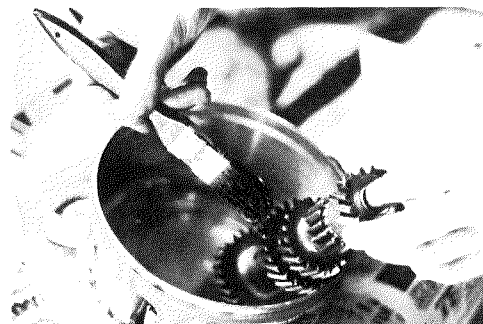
Brush clean the parts in petrol or similar. Avoid skin contact.
